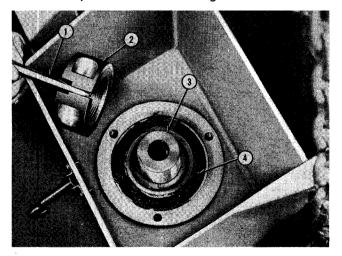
REMOVING	SPLIT	I NUT
